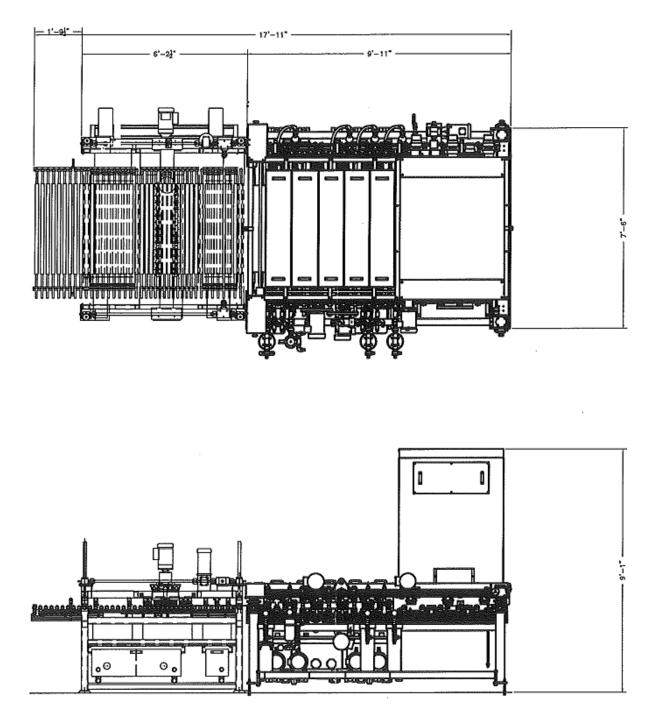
Billco Manufacturing Inc. 310-48-8 Flat Glass Washing & Drying Machine
